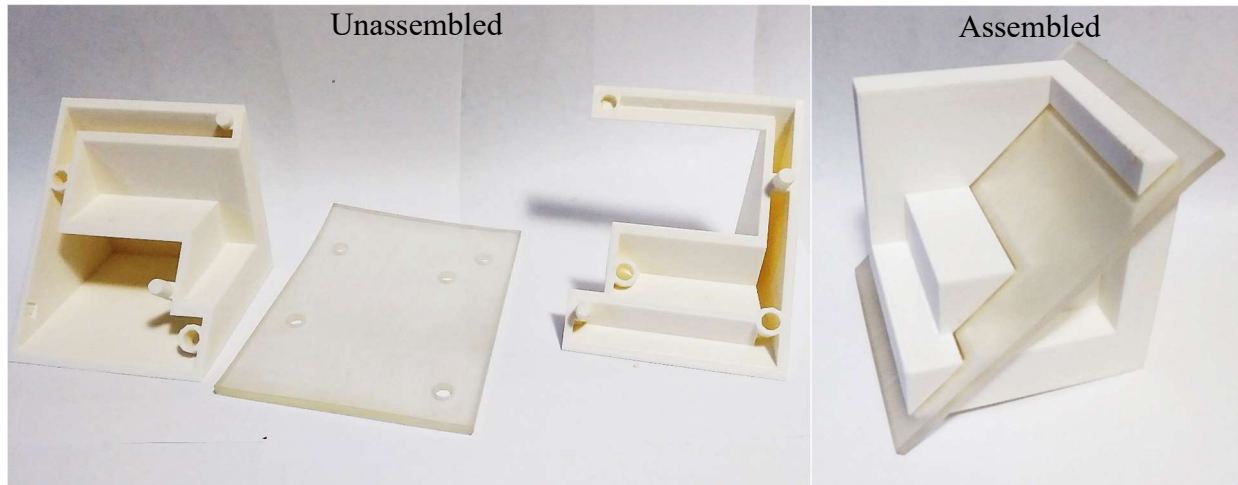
Photographs of three part 3-D printed TMCT Object before and after assembly.
